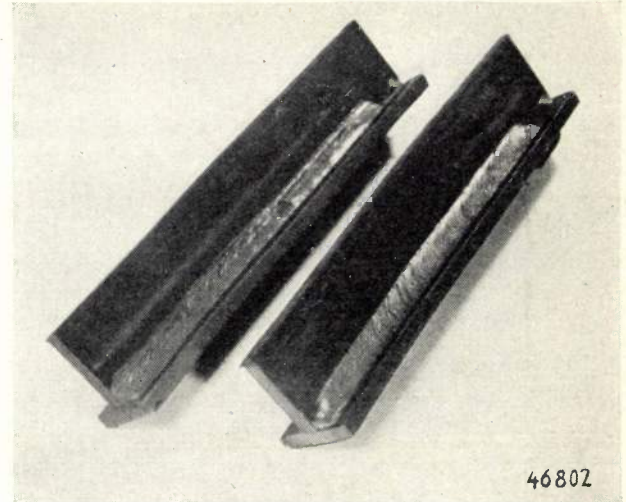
This photograph shows two fillet welds made in the flat position with Contact 15-5; that on the right, made with D.C., has a smoother surface than that on the left made with A.C.
